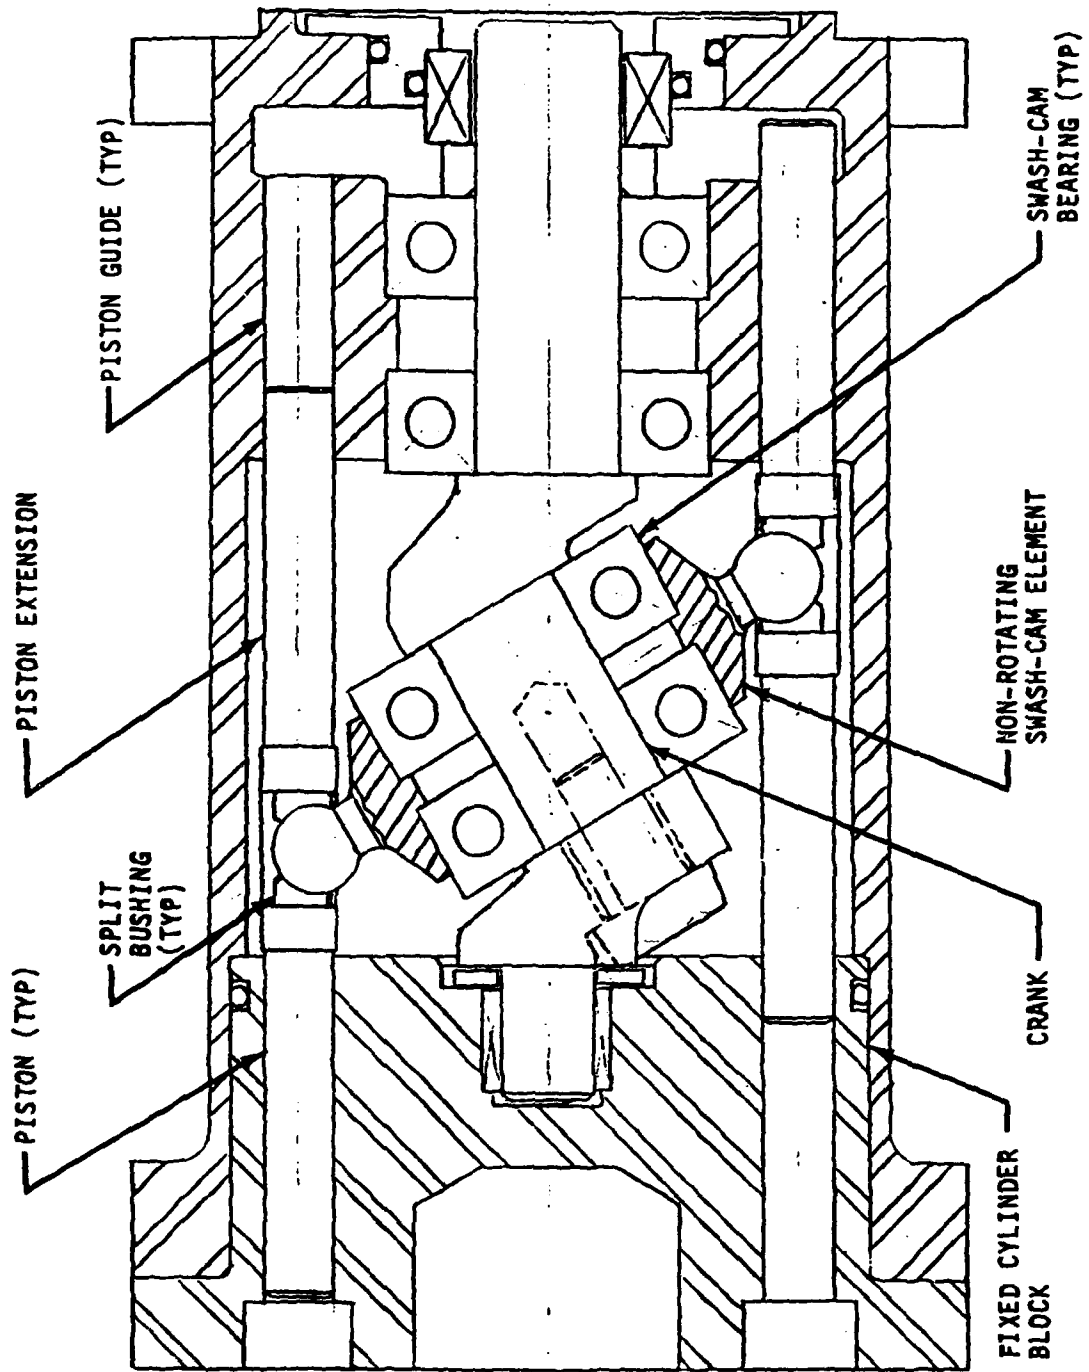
Thirty-degree six-piston hydraulic motor with extended pistons and guides
